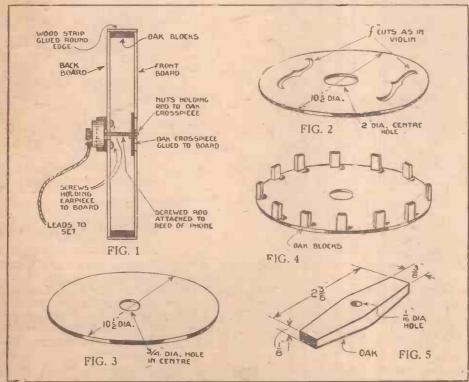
Section of Loud-speaker. Fig. 2.—Front Board. Fig. 3.—Back Board. Fig. 4.—Arrangement of Side Blocks. Fig. 5.—Oak Cross Piece.
